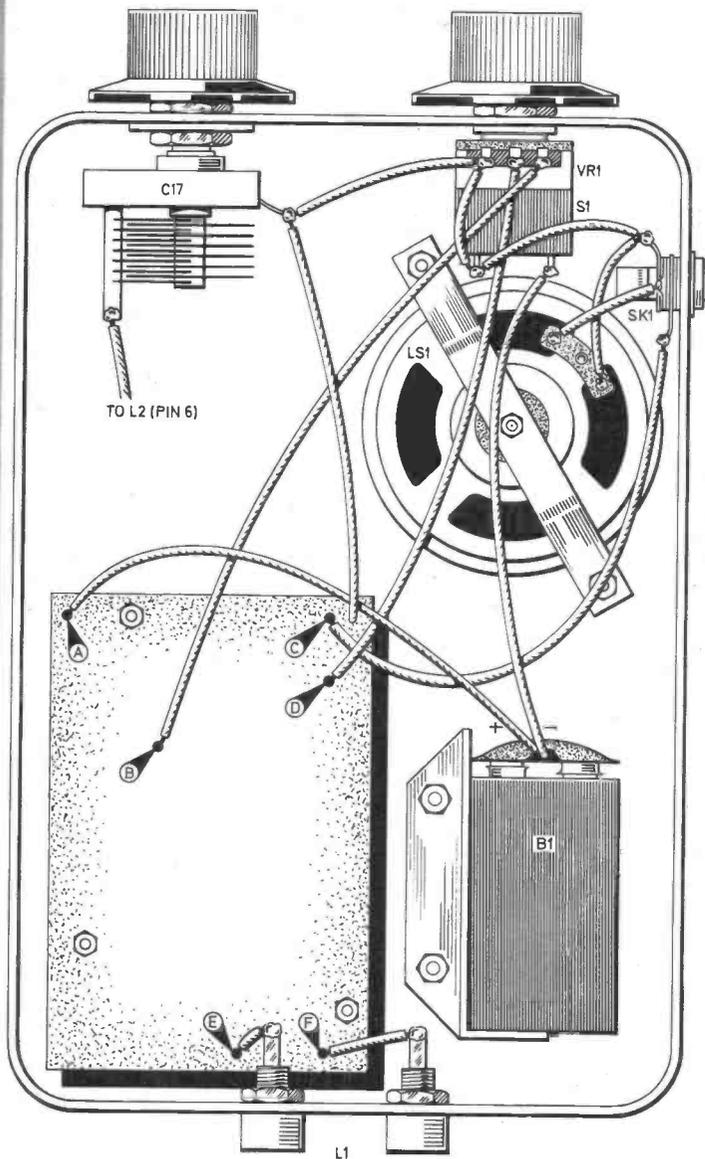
The layout of the components and board within the case and complete wiring up details.
